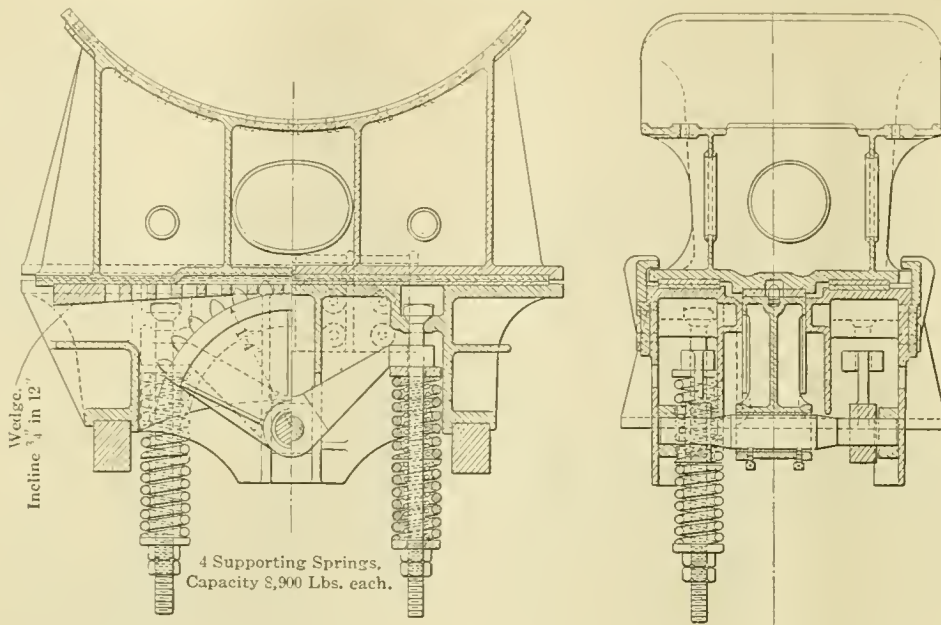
BOILER BEARING AND GUIDING DEVICE.
